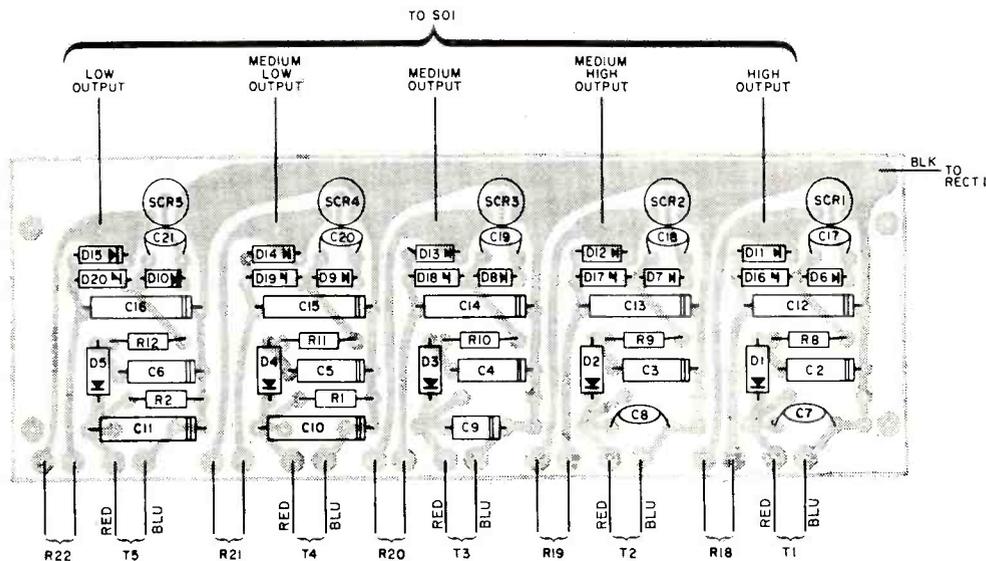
When mounting parts on the printed circuit board, be sure to position the diodes with the polarity markings as shown. Also, make all input and output connections from terminal pins on the circuit board.
